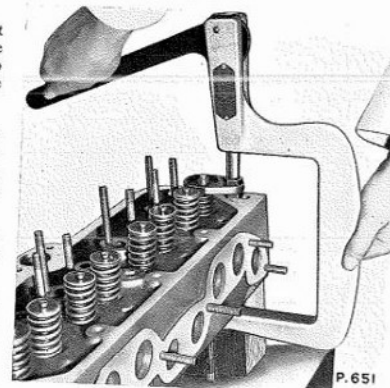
Compressing the valve springs and cup, using the Churchill Tool R.G.6513 and the compressor foot R.G.6513-1
